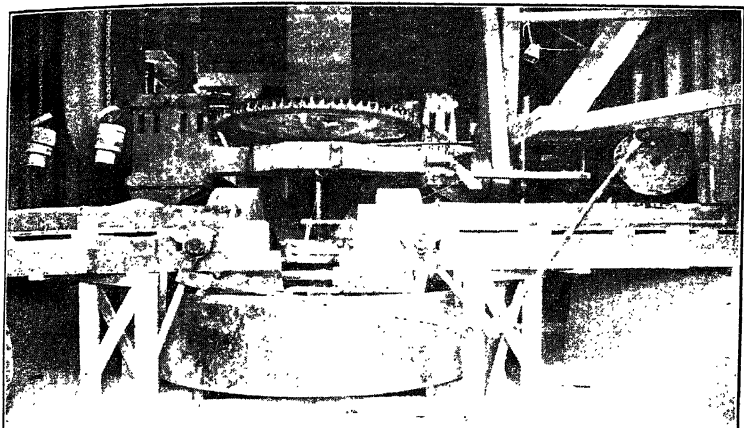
A wet pan for crushing or mixing. (Courtesy of Clearfield Machine Company.)
